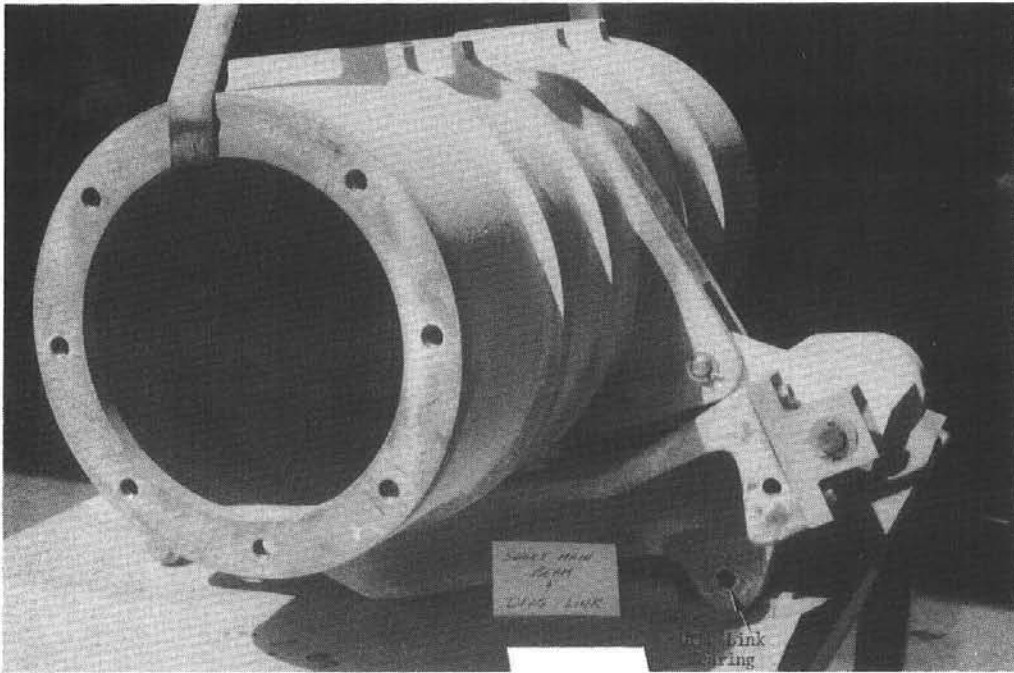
MDAC Torque Tube Drag Link Assembly after Test
